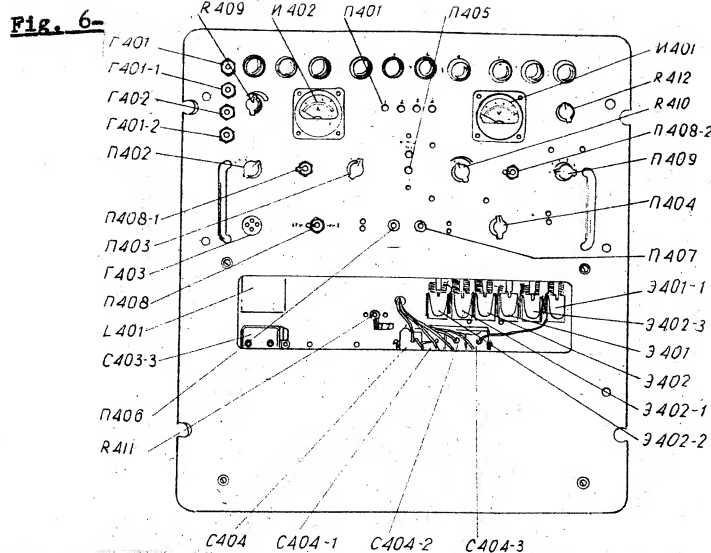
Central control unit (..Y) (front view with the cover of the cut-out removed).
